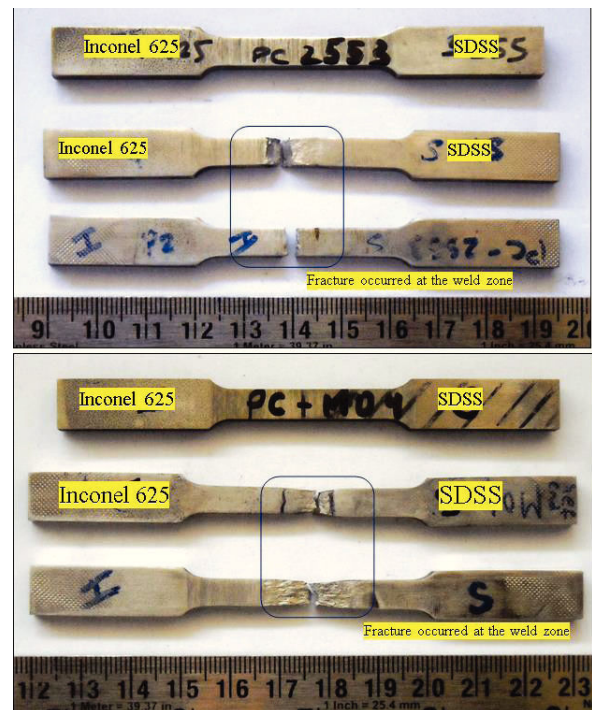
Photographs showing the tensile tested samples of PCGTA welded Inconel 625 and UNS S32750 employing (a) ER2553 and (b) ERNiCrMo-4 filler.
